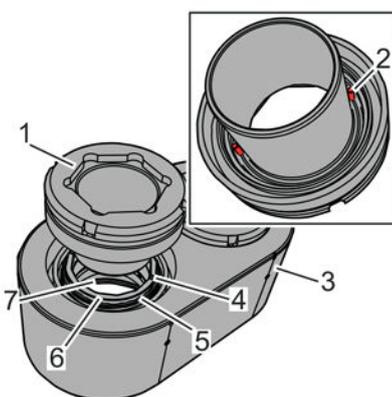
Inserting the rotating slide ring sealing part, detailed bottom view
